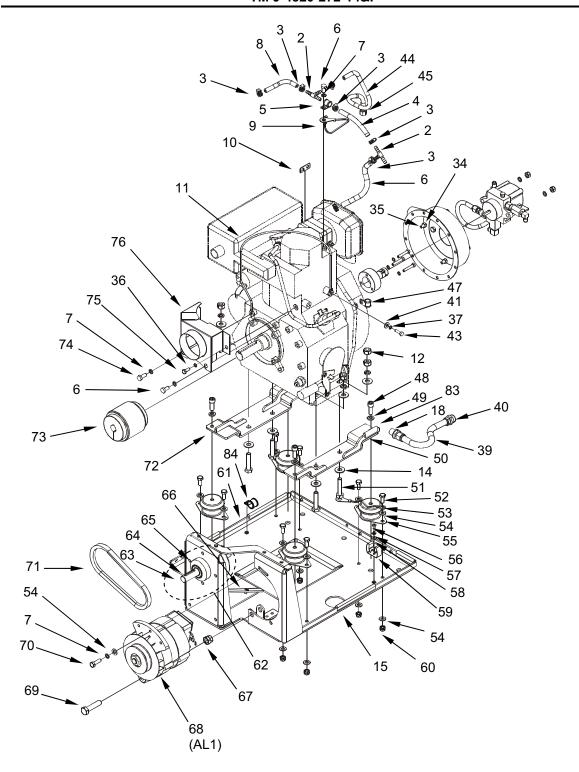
Assembly, Engine System (Front View) (Sheet 2 of 3).
